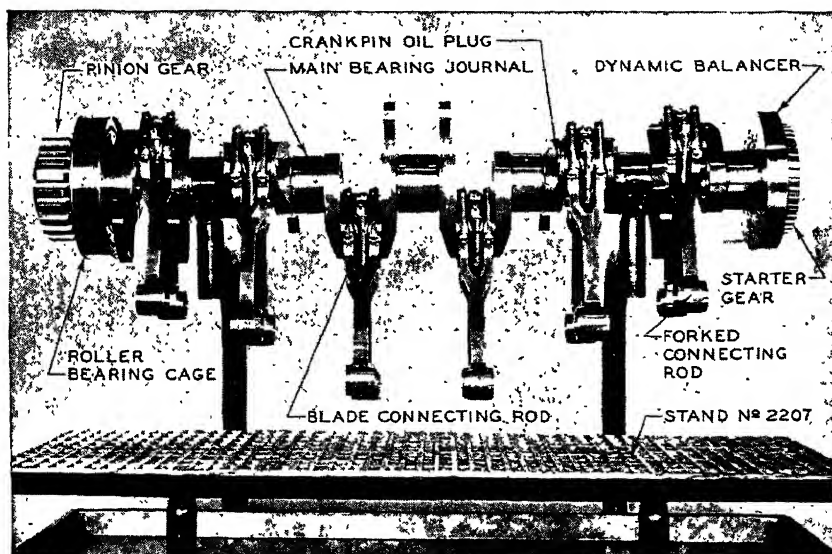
Allison crankshaft and connecting-rod assembly. (*Allison Division, General Motors Corp.*)
